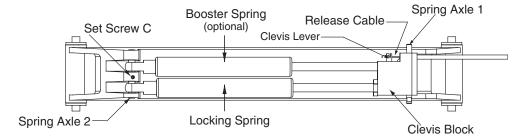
Inside View of Pendant Arm with Top Cover Removed
